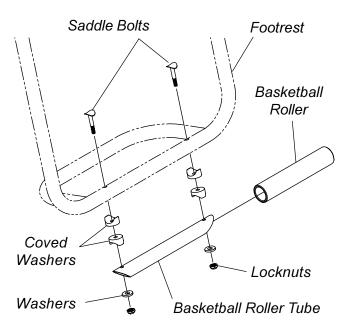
INSTALLING BASKETBALL ROLLER
